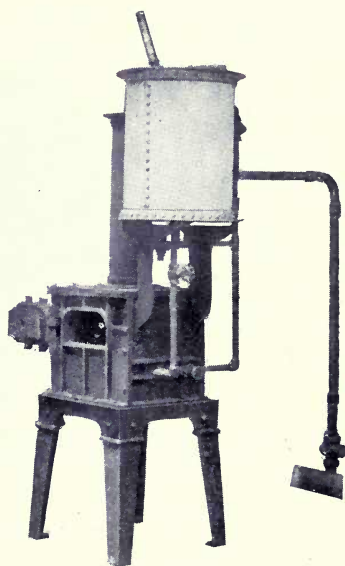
OVEN FURNACE WITH PATENT AIR-HEATER AND JACKETED TANK.
